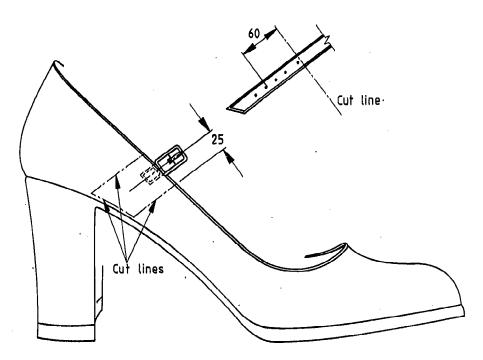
/5a. Buckle attached to a closed-in quarter via a separate buckle loop (Upper marked for the cutting of a type A test piece.)
